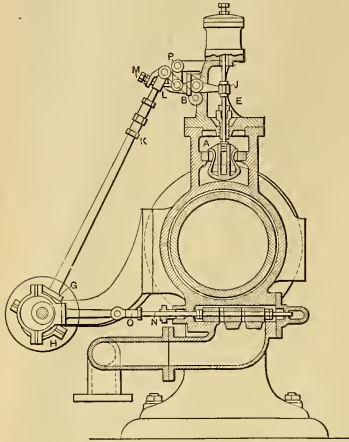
CROSS-SECTION OF ROBEY ENGINE CYLINDER WITH RICHARDSON-ROWLAND TRIP VALVE GEAR
